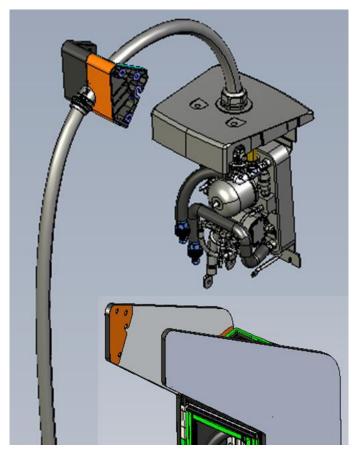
Roof assembly, Turbo Charger with closed secondary cooling circuit shown
